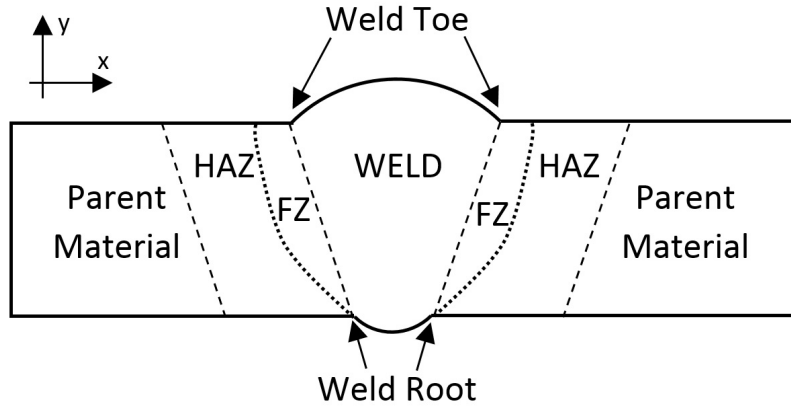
Illustration of the four areas in a weld: the Weld, the Fusion Zone (FZ), the Heat affected Zone (HAZ) and the parent material.
